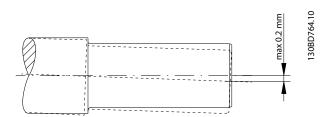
Maximum Allowed Eccentricity of the Conveyor Shaft
